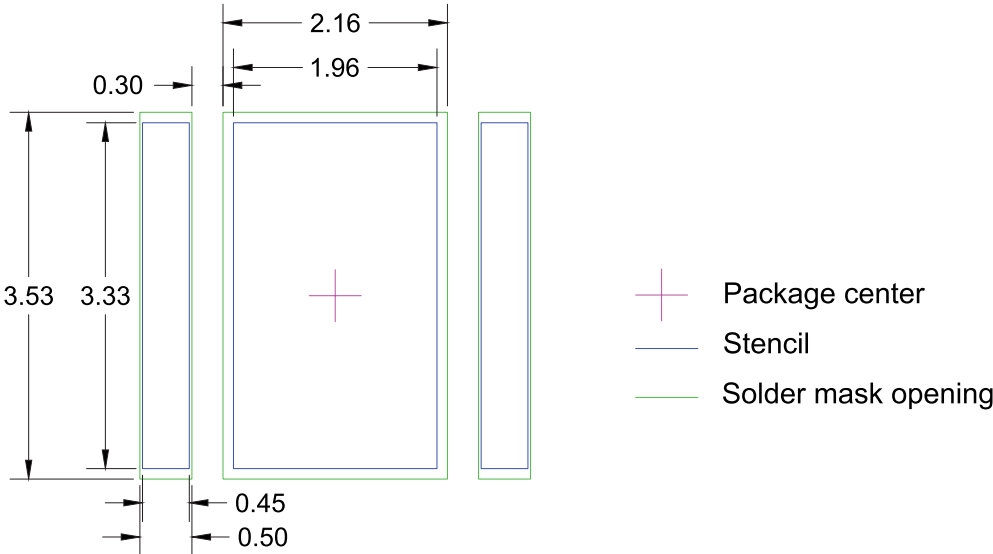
Recommended PCB solder pad layout for LUXEON V.
